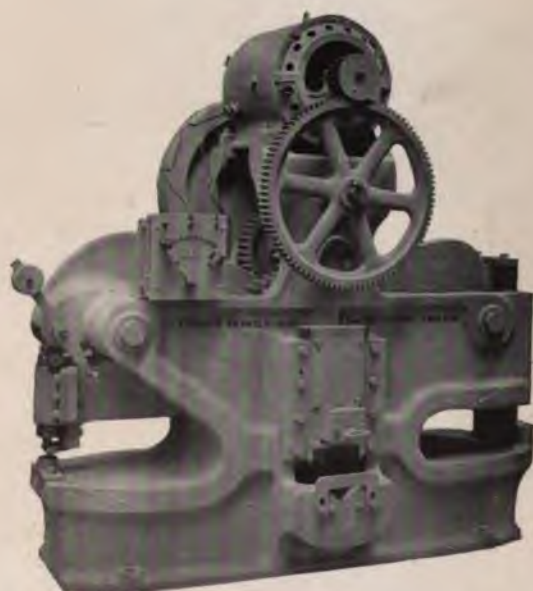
LEVER PUNCHING AND SHEARING MACHINE.
